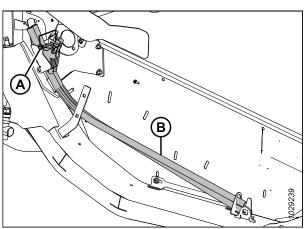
Divider Rods in Shipping Storage at Right Header Endsheet
